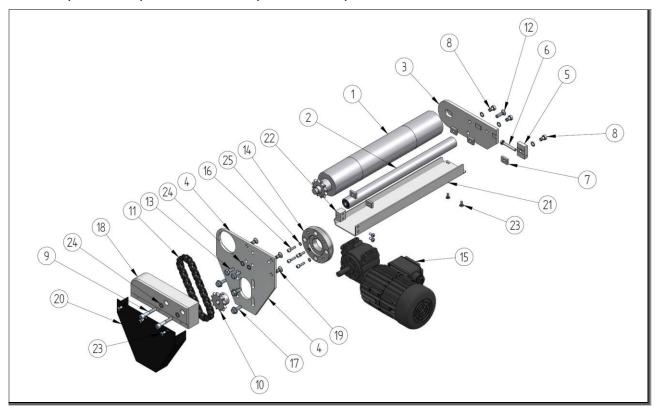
Parts list: Drive underneath - drive unit/motor unit - position of drive unit 14 - ZZ.900.0147
